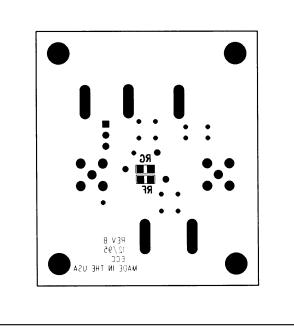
MAX4278 EV Kit Component Placement Guide— Solder Side
